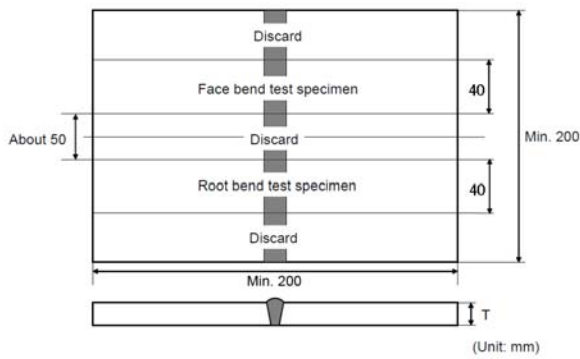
Dimensions and types of test assembly for butt welds
